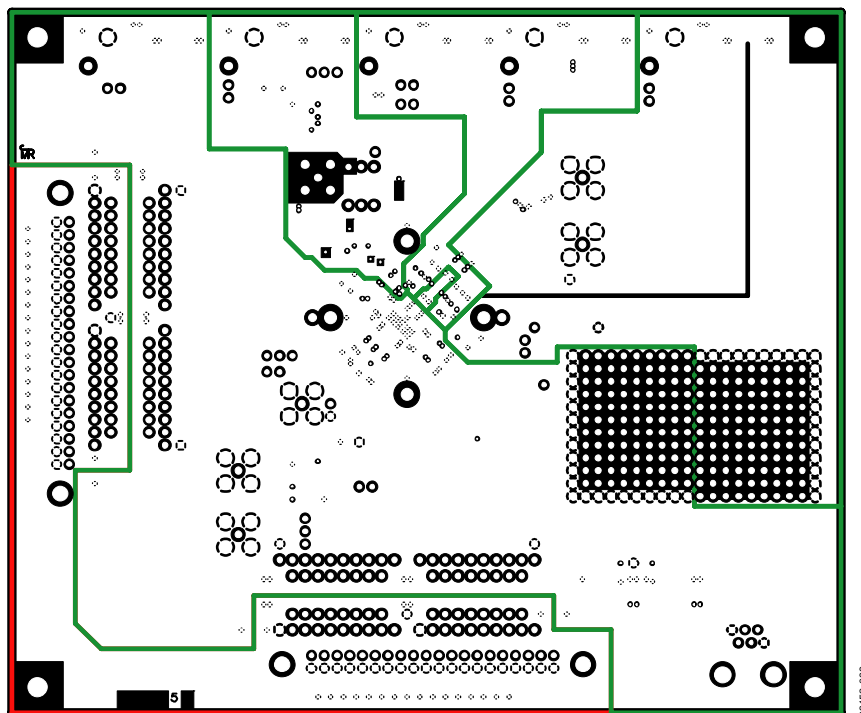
PCB Assembly, Layer 5 Metal (Ground Plane), Rev. F Evaluation Board
